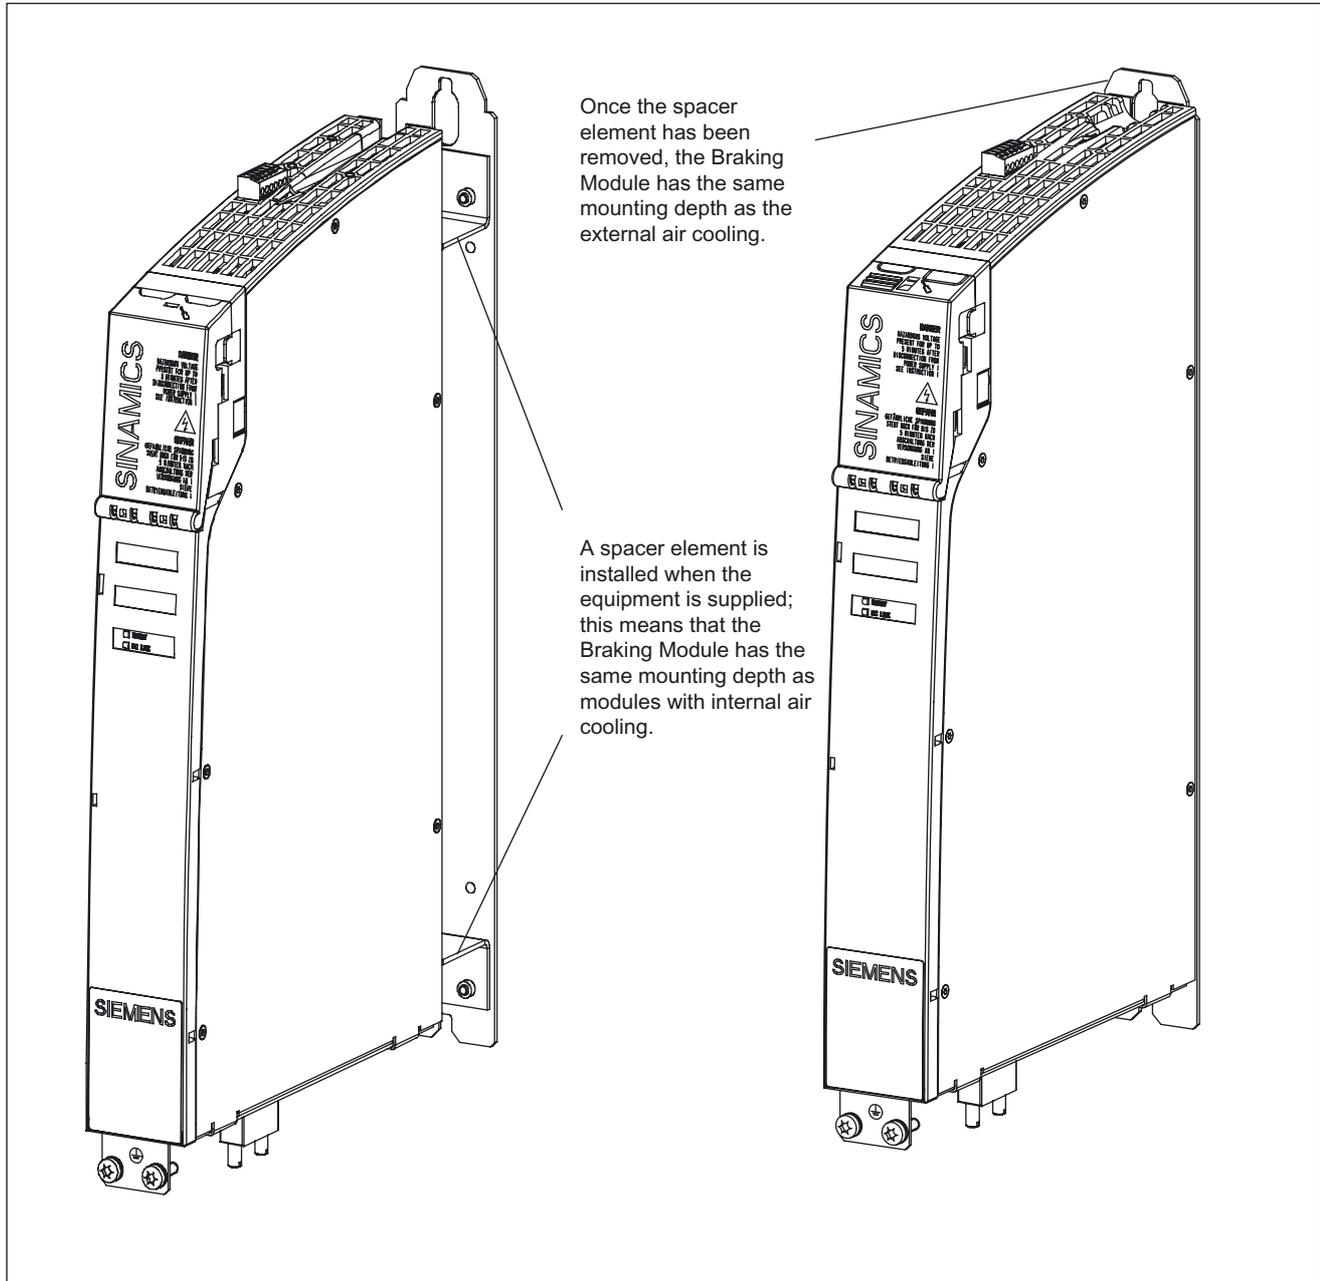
Methods of installing Braking Modules with/without spacer elements
